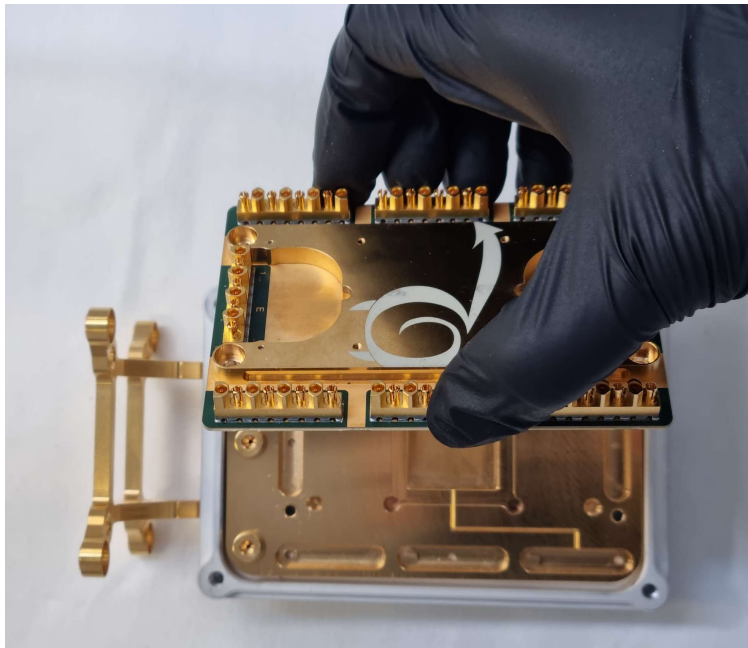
Placing the sample board (QCAGE-64-PCB) into the QCage.64 (QCAGE-64-STD).
